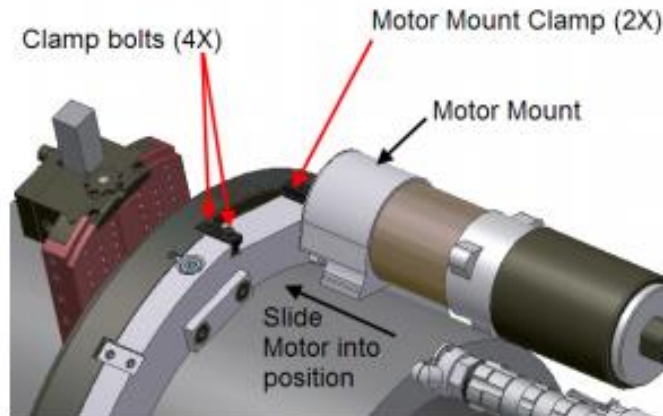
Flange Facing Tool Bit Clamshell Lathe
